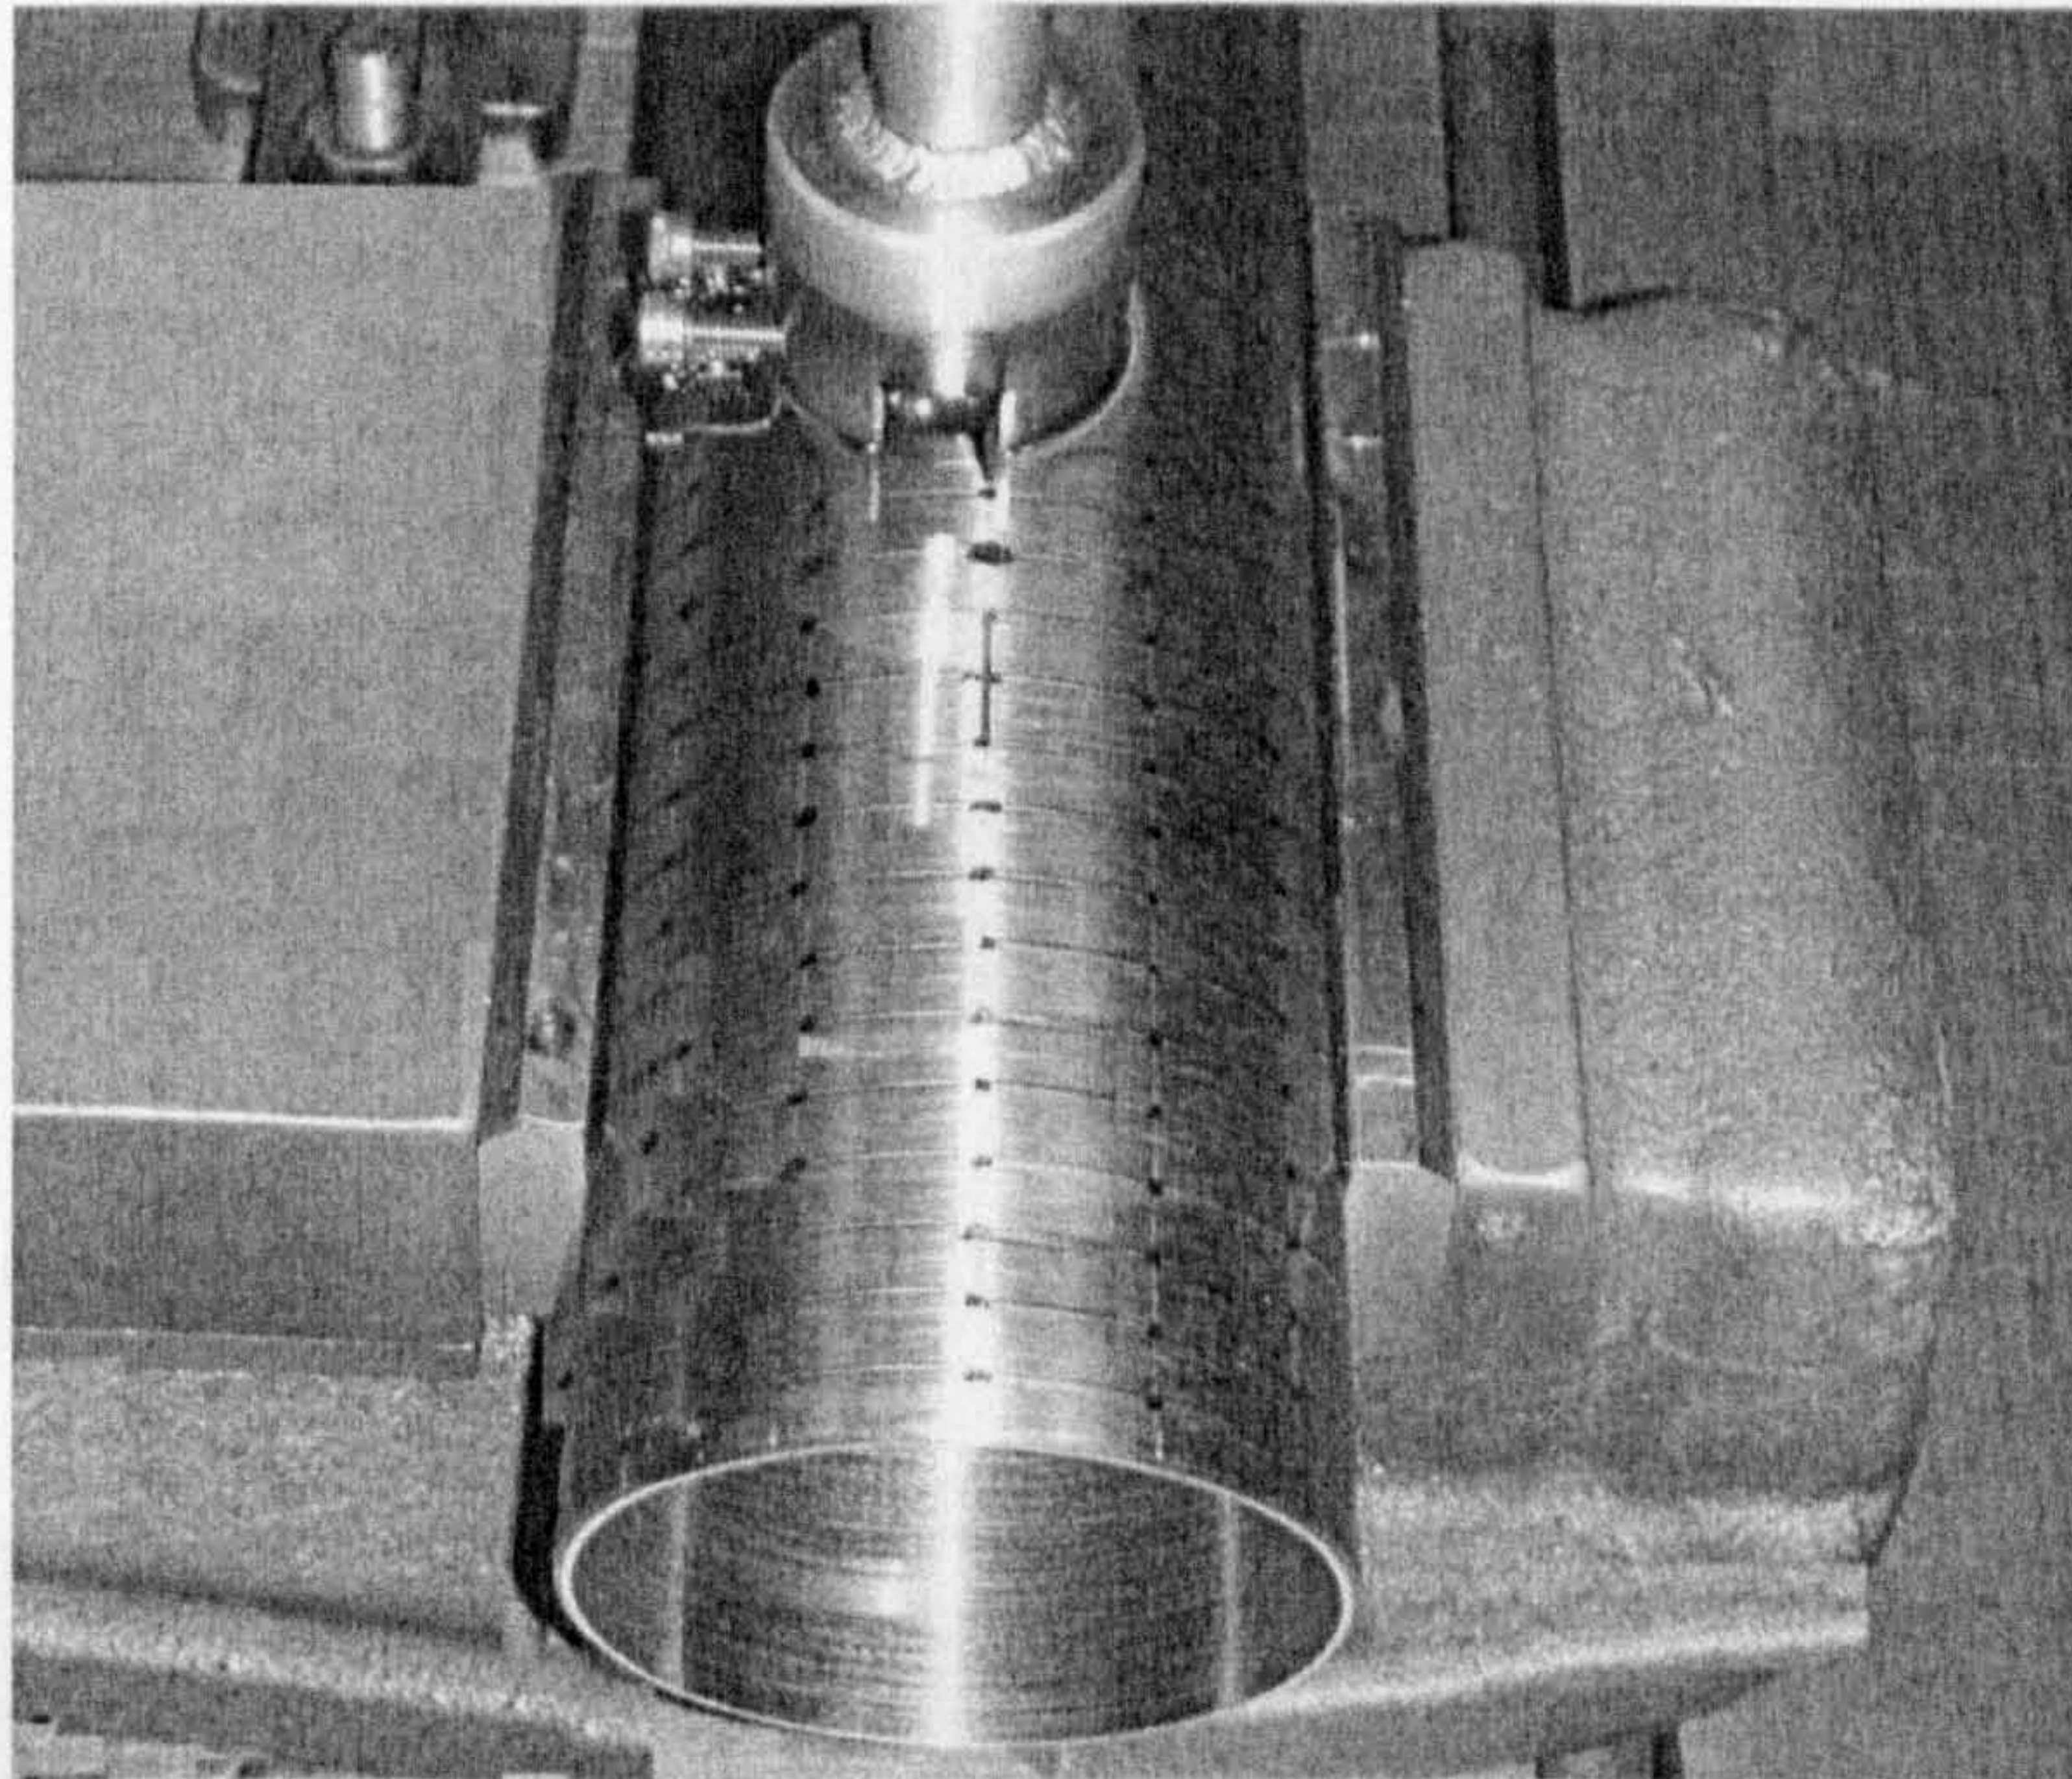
Part, P2, of pipe, SP5, in the spark erosion machine. The case of two axial gouges is shown.
